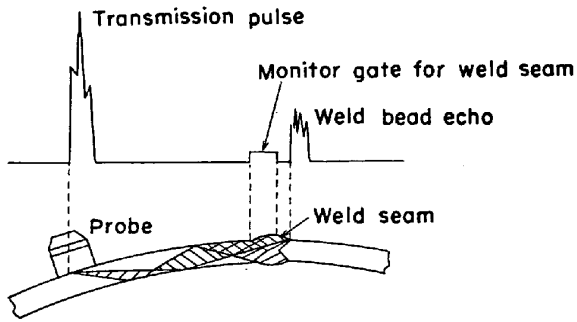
Relationship between weld bead echo and monitor gate for weld seam.
